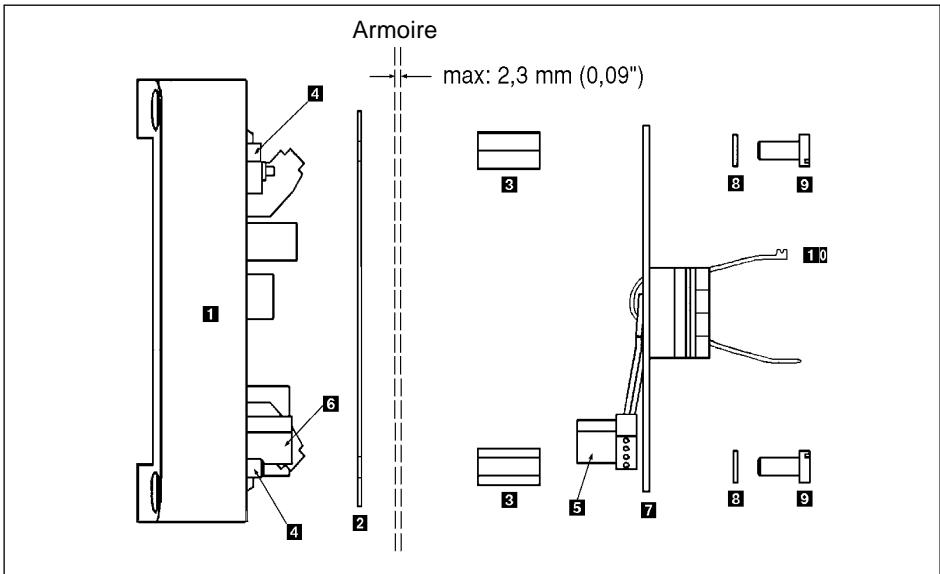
Spare Parts Explosion Drawing Panel Version
